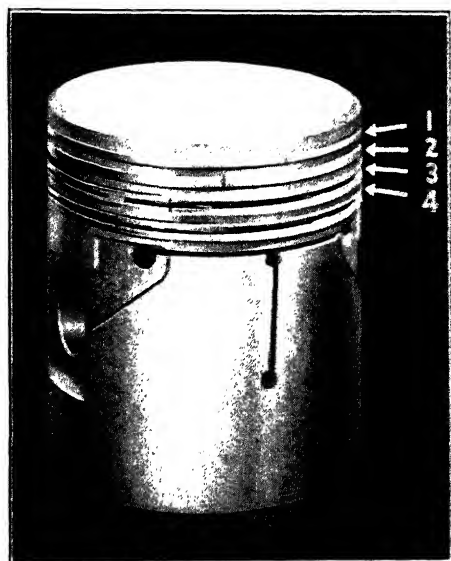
Oldsmobile Piston Showing Compression and Oil Control Rings, Horizontal and T-slots
